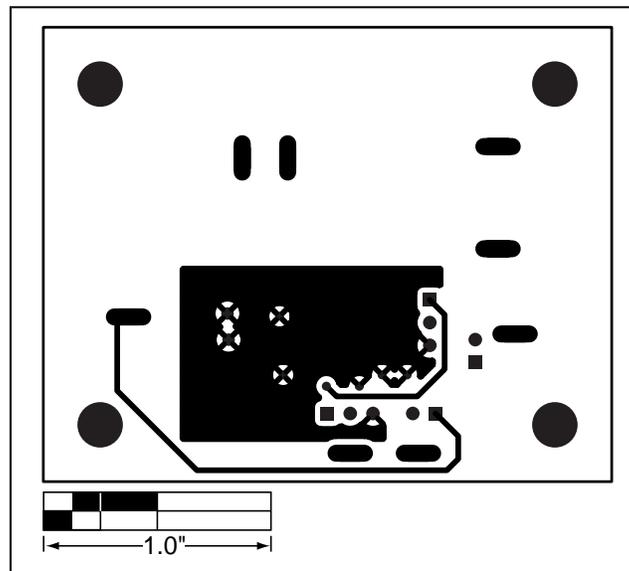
MAX1685 EV Kit PC Board Layout—Solder Side
